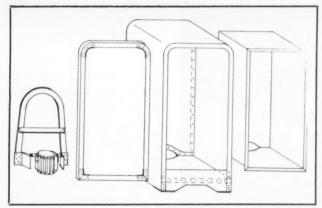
Sketch of late model Frigidaire, which is completely welded.
